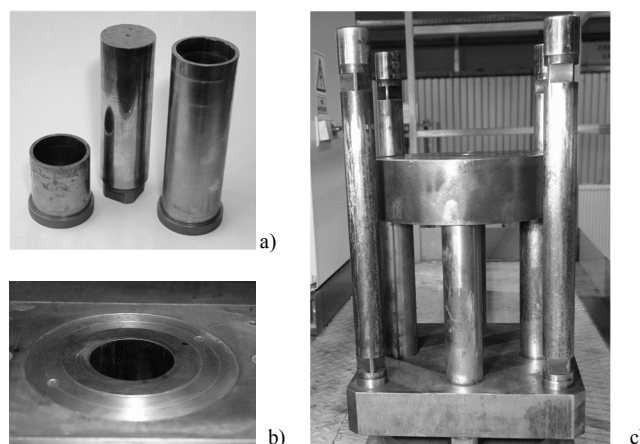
Die (a), upper punch, core and lower punch (b) and an assembly of shelves and columns (c)
